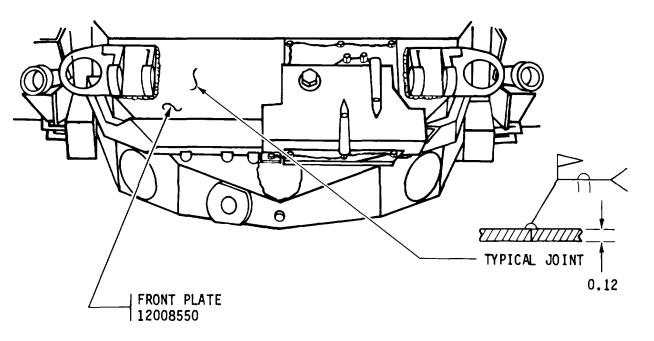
Repair welding procedure for cracks in front plate 12008550.
